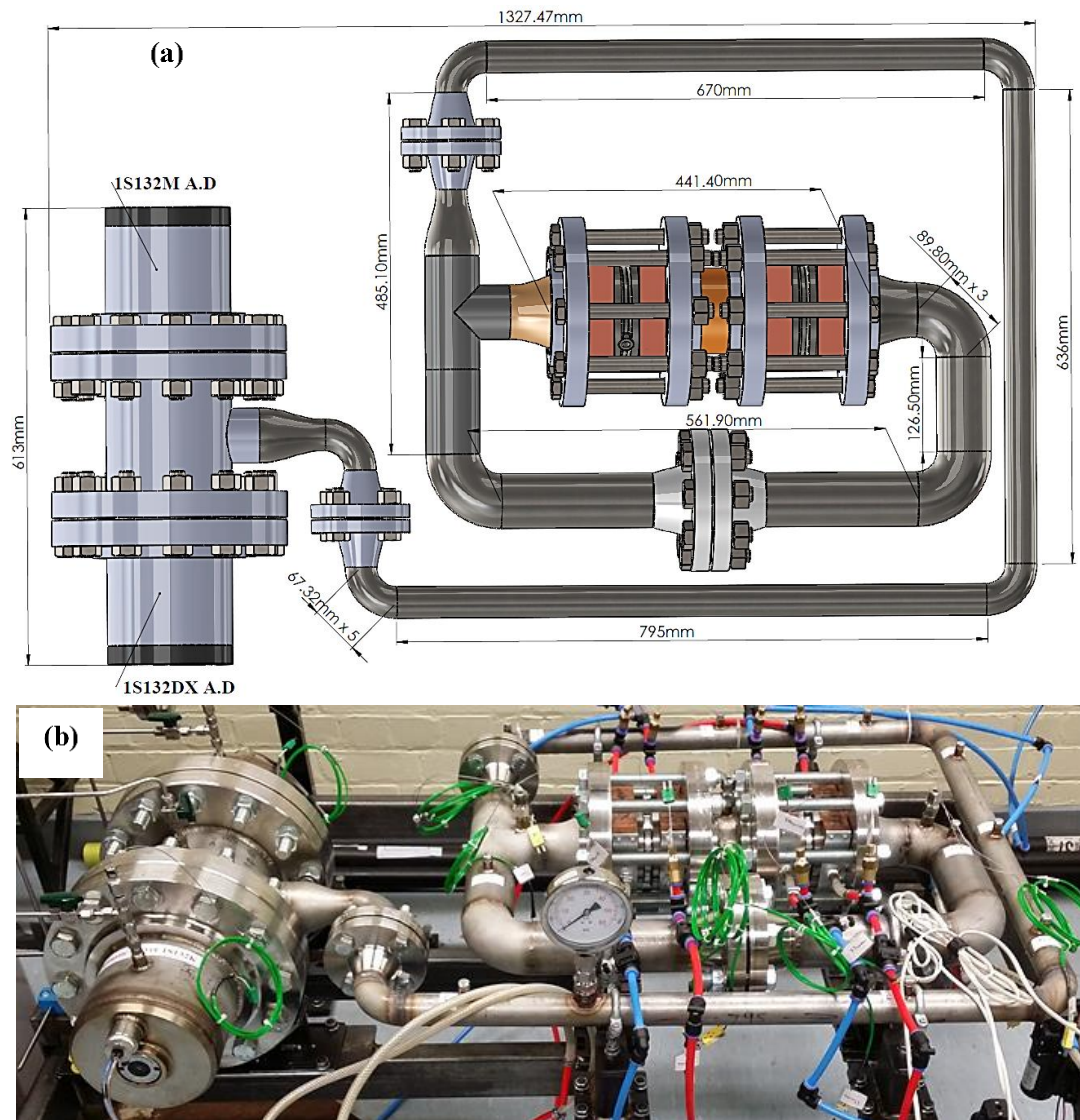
General assembly drawing (a) and experimental apparatus (b) of the two-stage, twin-acoustic driver thermoacoustic refrigerator.
